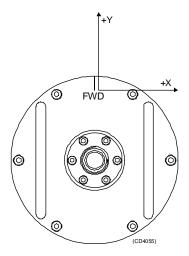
Top view of the double inclinometer separate unit - showing the front direction
